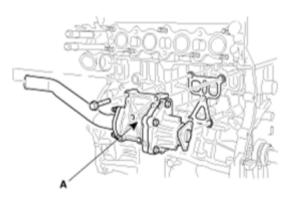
Identifying Water Pump Courtesy of KIA MOTORS AMERICA, INC.
